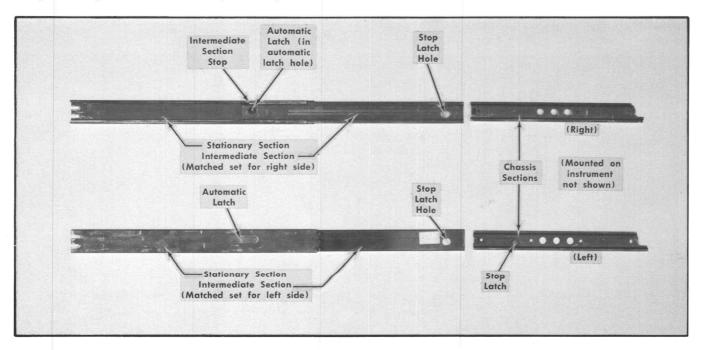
Illustration showing the 1 3/4-inch wide slide-out track assemblies.
